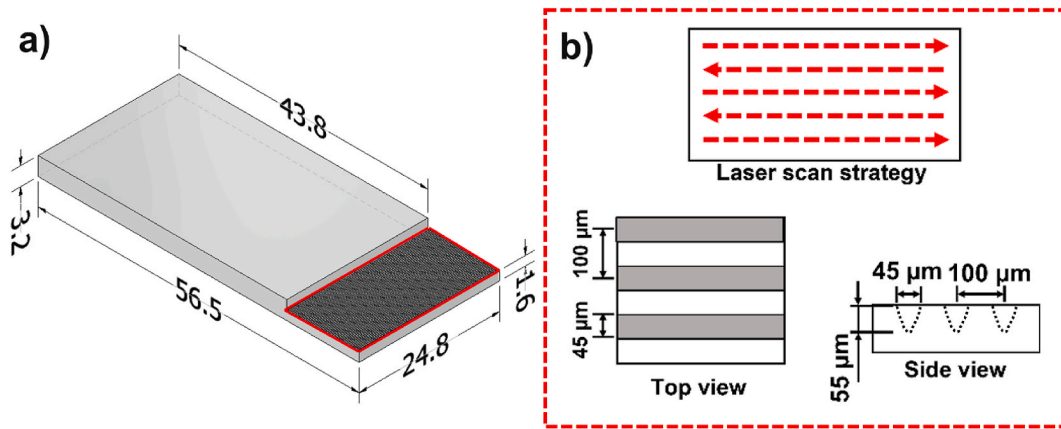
Geometry and dimensions (in mm) of the AA6061 insert (a) and laser texturing micron-scale design (b).
